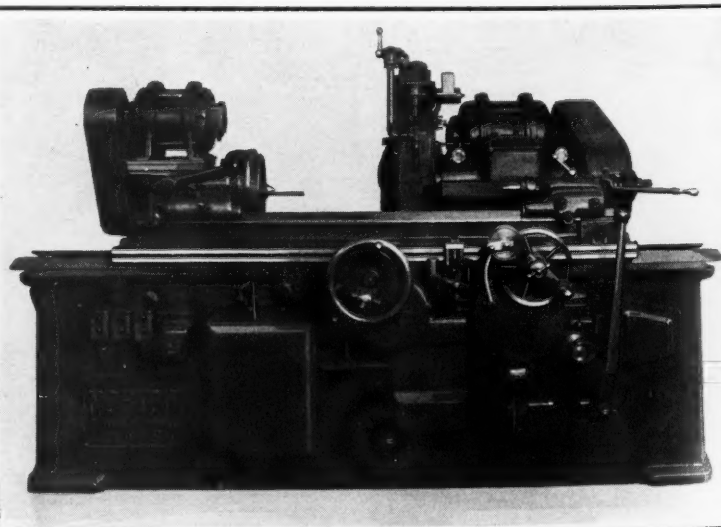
Cylindrical Grinding Machine Equipped with an Electrical Sizing Device that Stops the Feed of the Grinding Wheel Automatically
